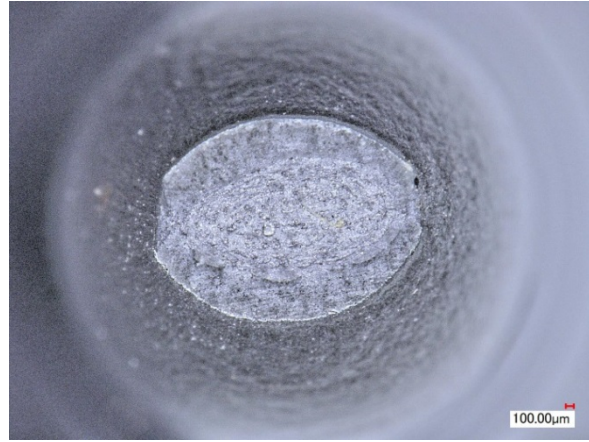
Fracture surface for expanded and strain-aged circumferential tensile test specimen 180° from weld seam.
